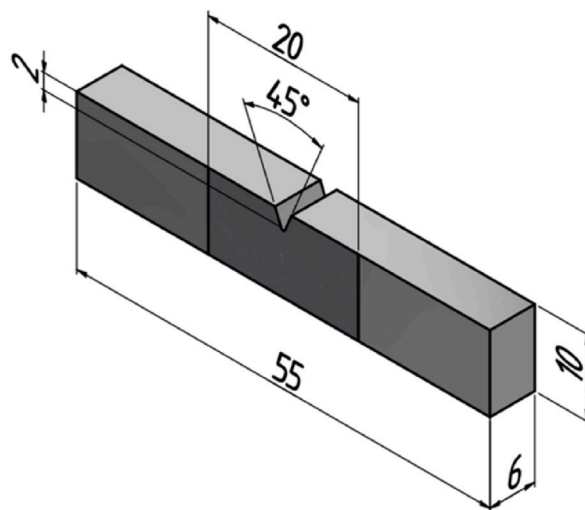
Dimensions of ASTM E23-07a Standard impact testing specimens.
